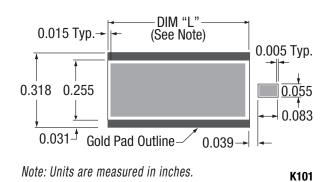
8 mm (EP) Coaxial Resonator Footpad Dimensions
